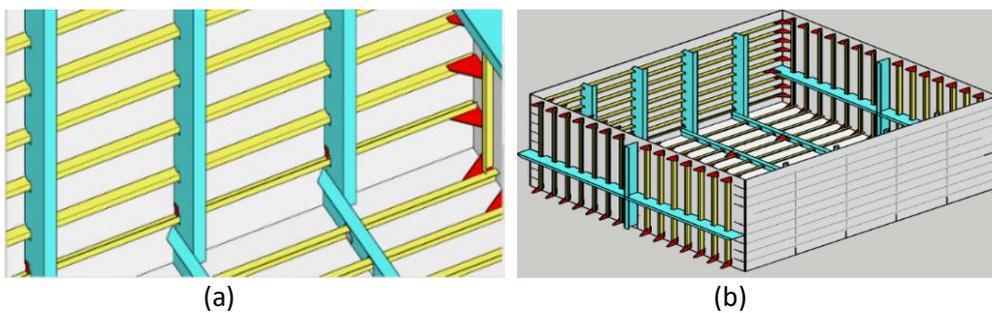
(a) Web frame bottom joint to vertical web frame, (b) erection longitudinal bulkhead frame 21 - 26 starboard
